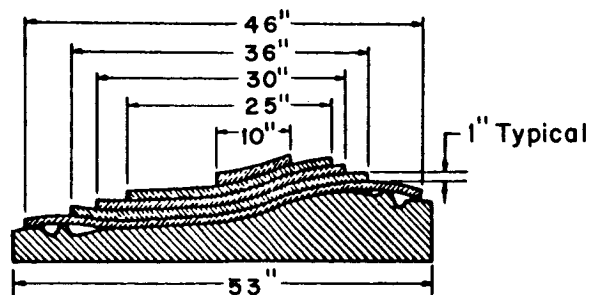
POSITIONING OF RUBBER BLANKETS (REF. 62)
